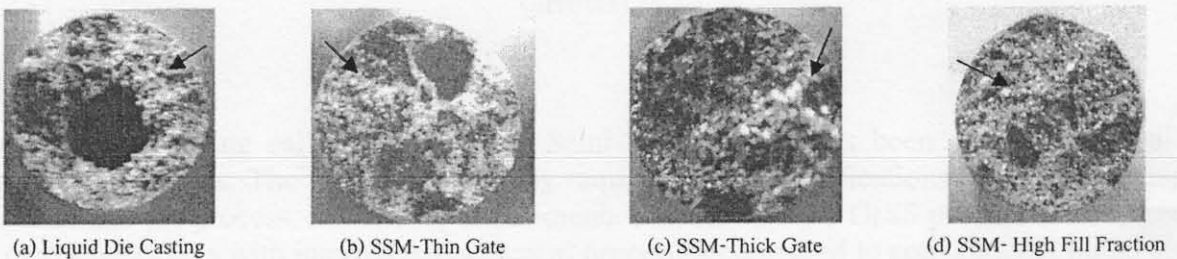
Fracture surfaces of representative samples. Arrows point at intermetallic phases.
